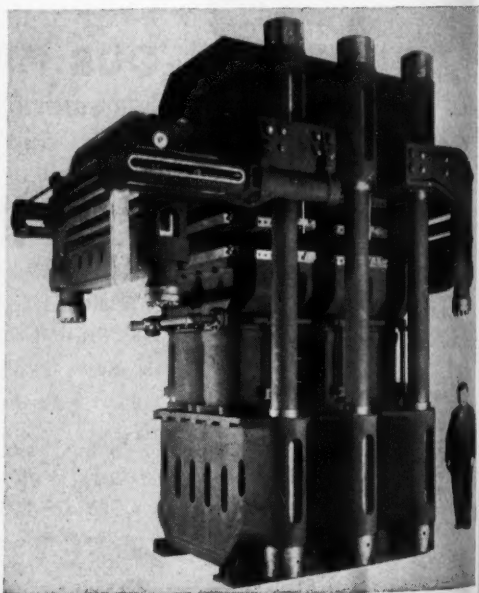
A large press of 2000 tons capacity for curing endless rubber belts, printers' blankets and similar rubber goods. Equipped with hydraulic stretcher and clamp for stretching the material under cure.
